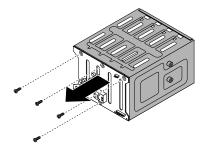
Removing the 3.5-inch hot-swap hard-disk-drive backplane
